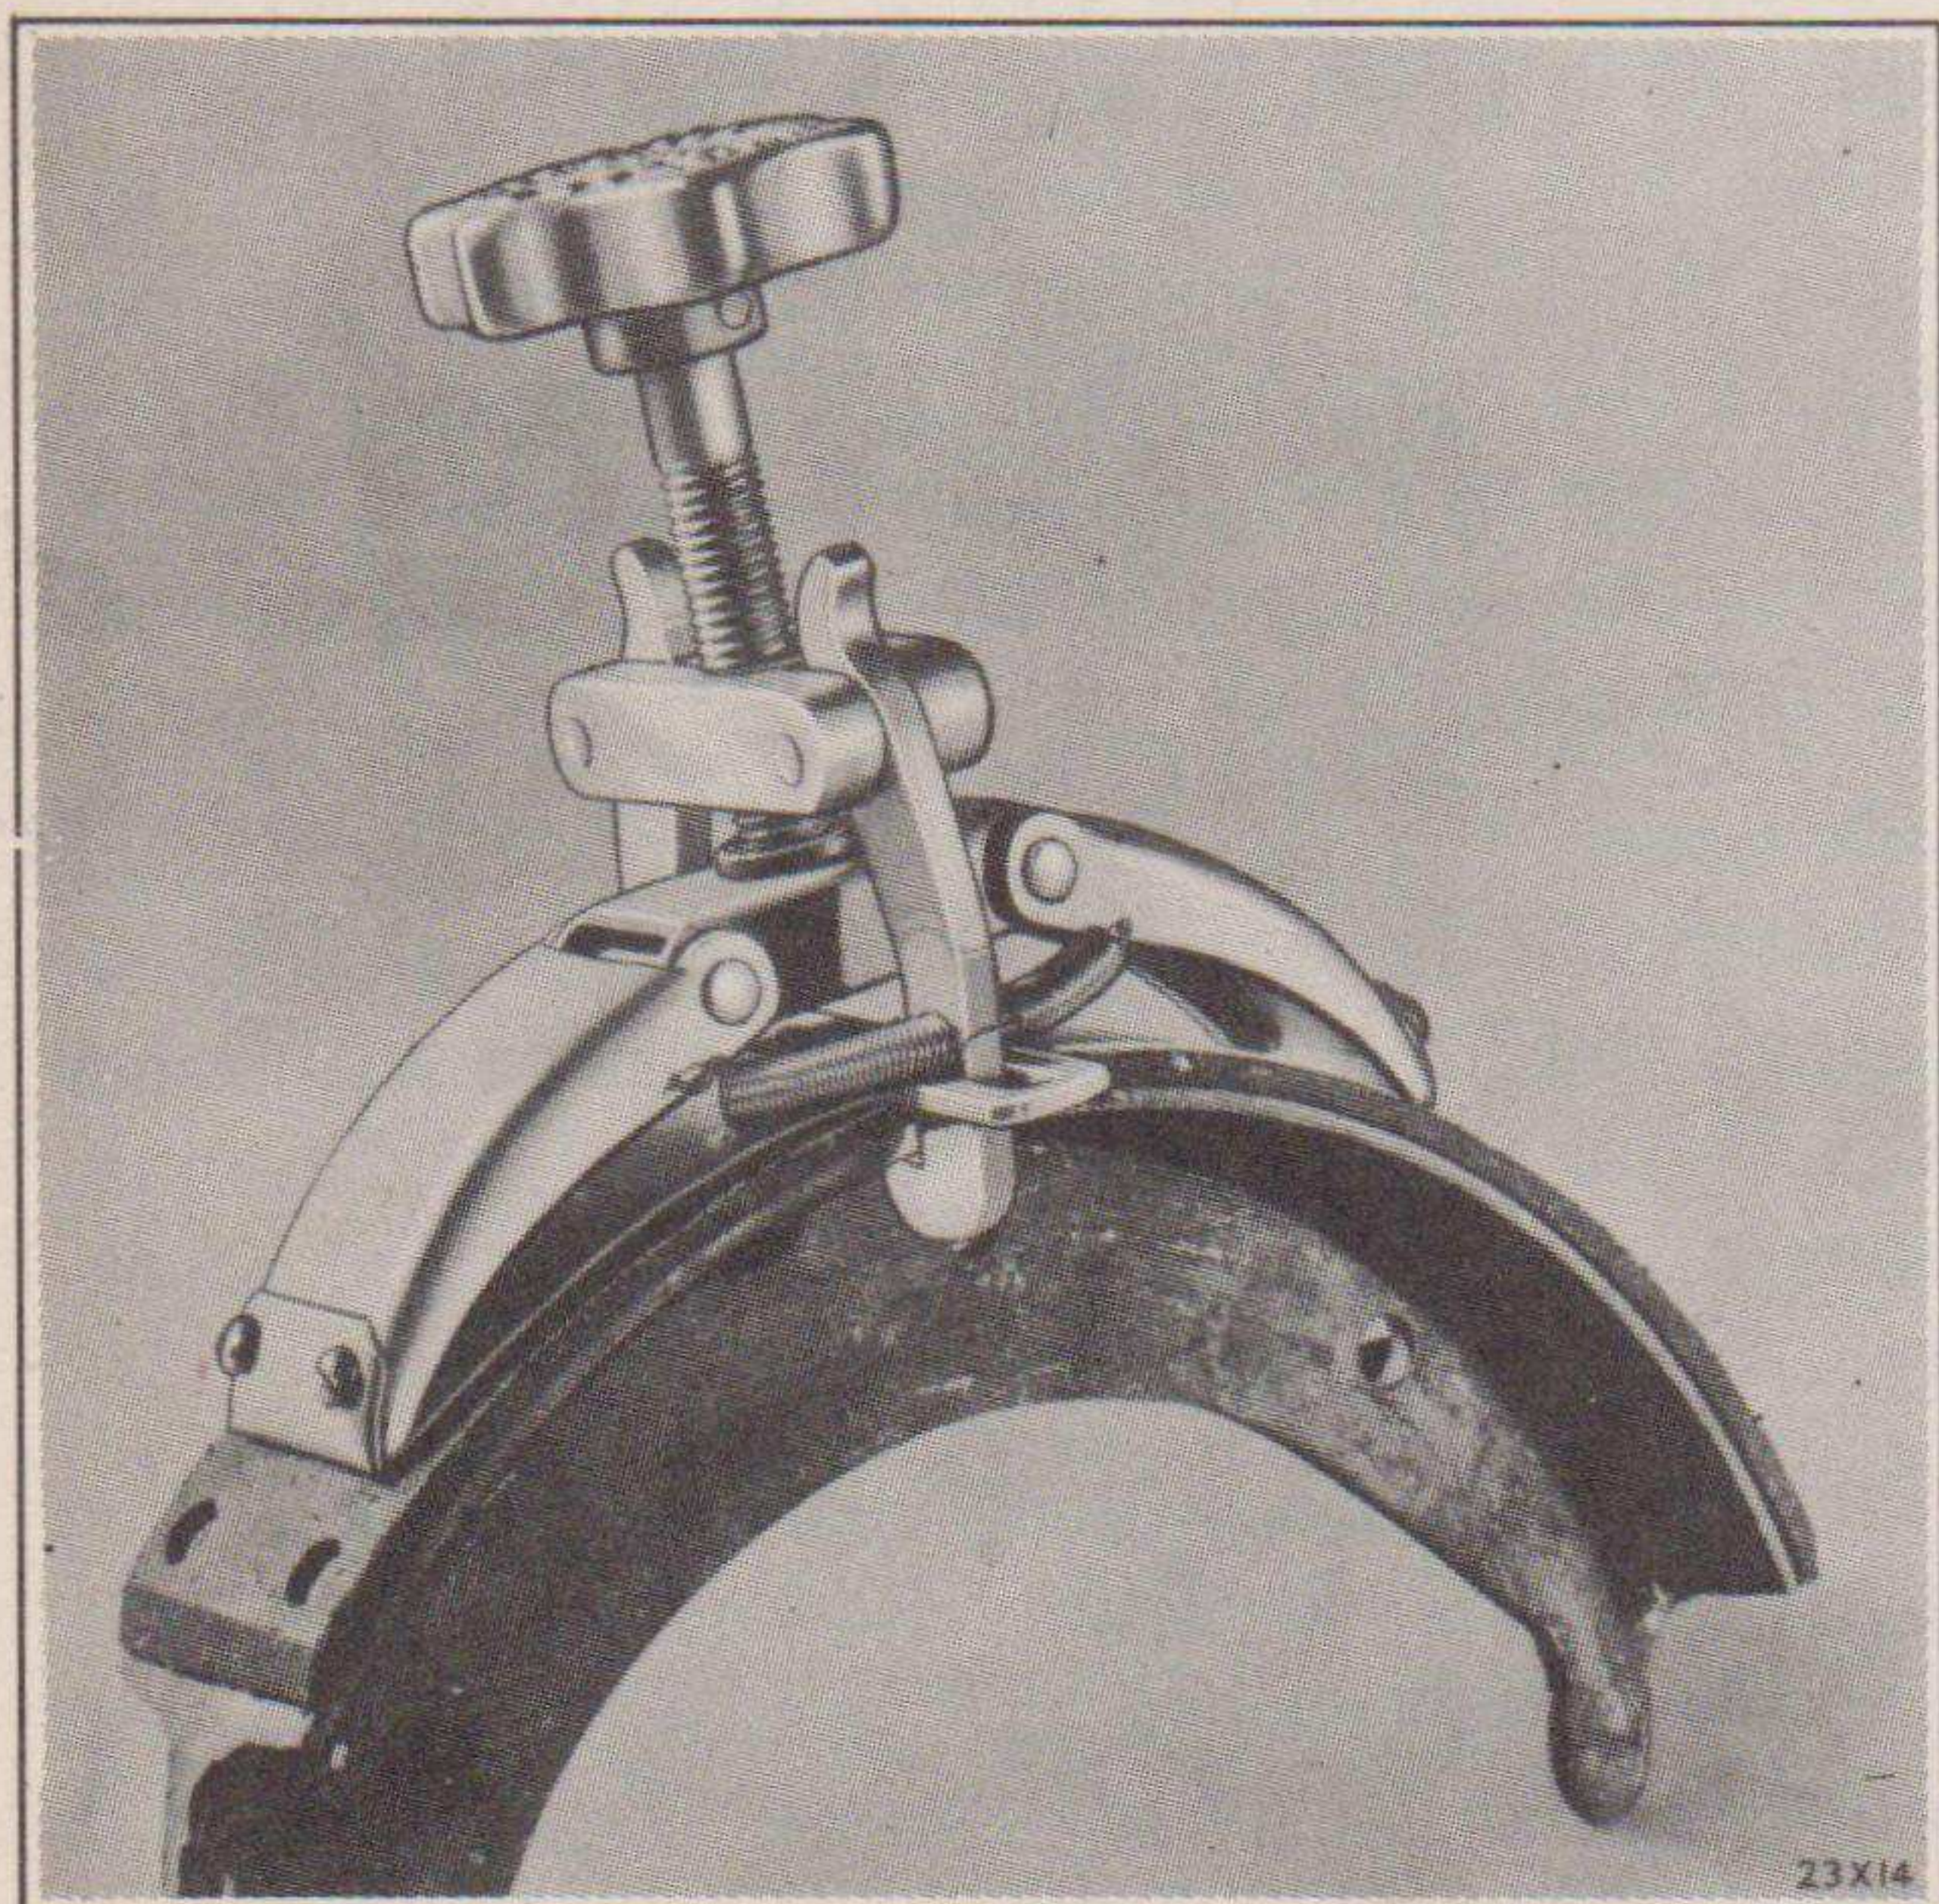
Stretching Brake Shoe Facing with Tool C-557
